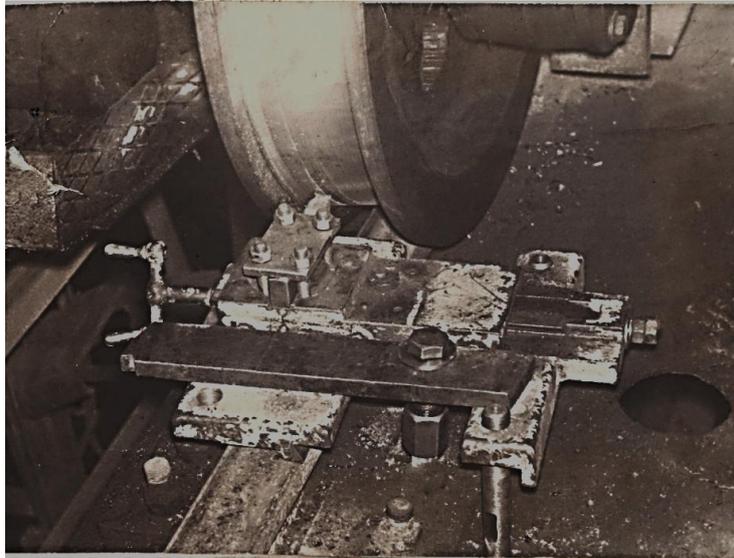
Apparatus for turning the rolling surfaces of crane wheels without dismantling them
